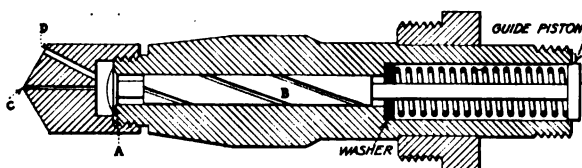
Fairbanks-Morse oil engine fuel atomiser nozzle.
